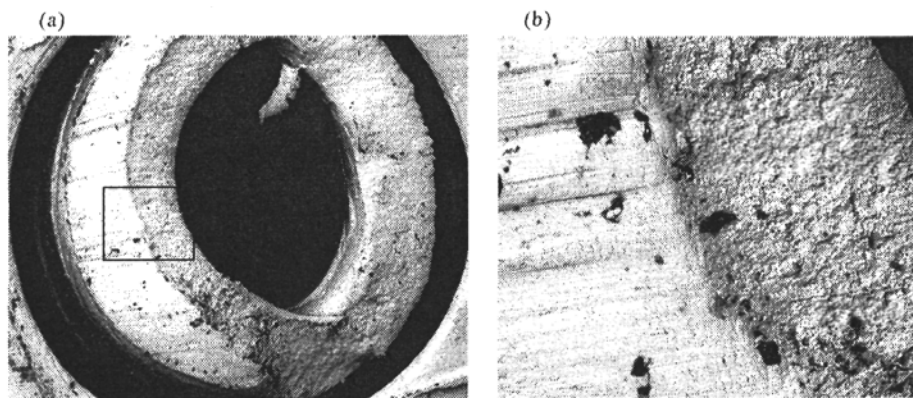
View of a damaged rivet after a destructive test (JEOL scanning microscope)
